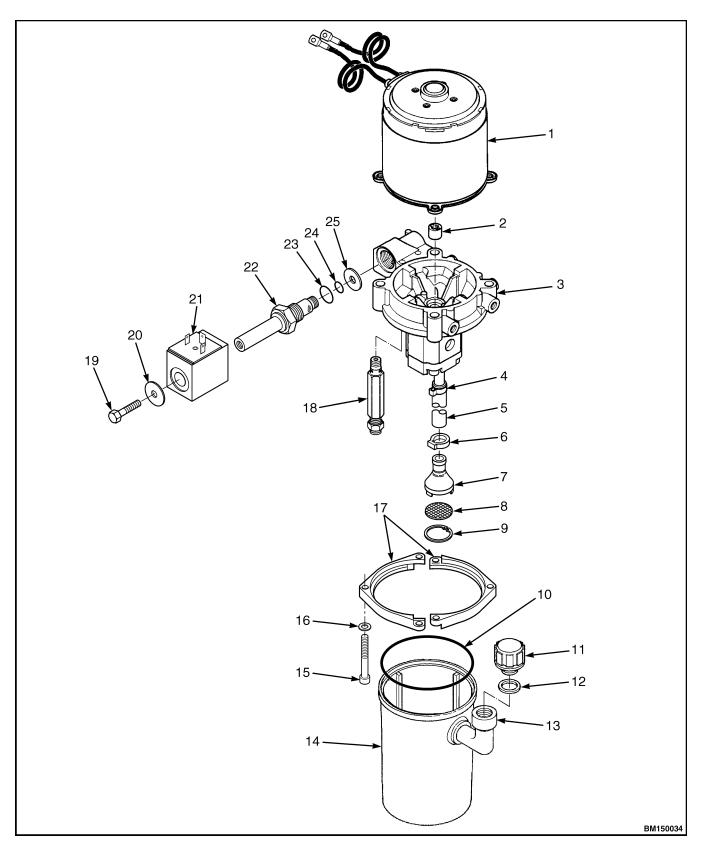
Lift Pump and Motor Assembly for B60Z, B60Z^{AC}, C60Z, C60Z^{AC}, and W60Z Lift Trucks
